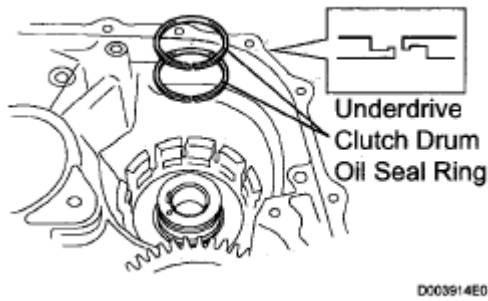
Identifying Underdrive Clutch Drum Oil Seal Ring
